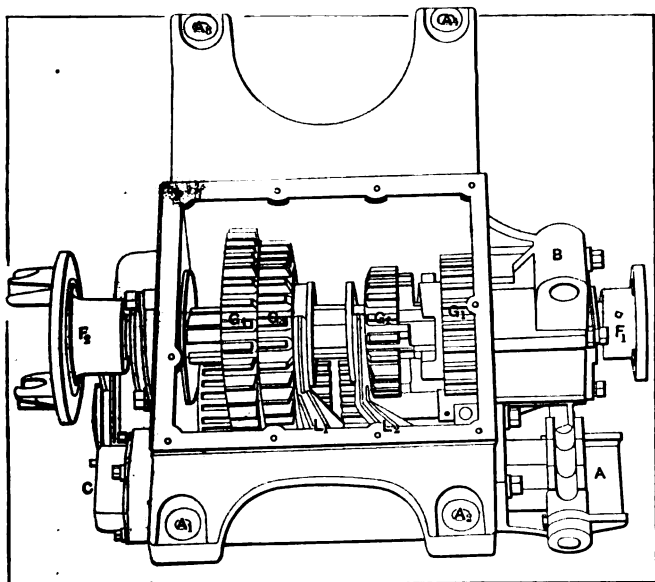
Plan view of the gear box of the 50-horsepower Kissel Kar, showing the relation of the several members
